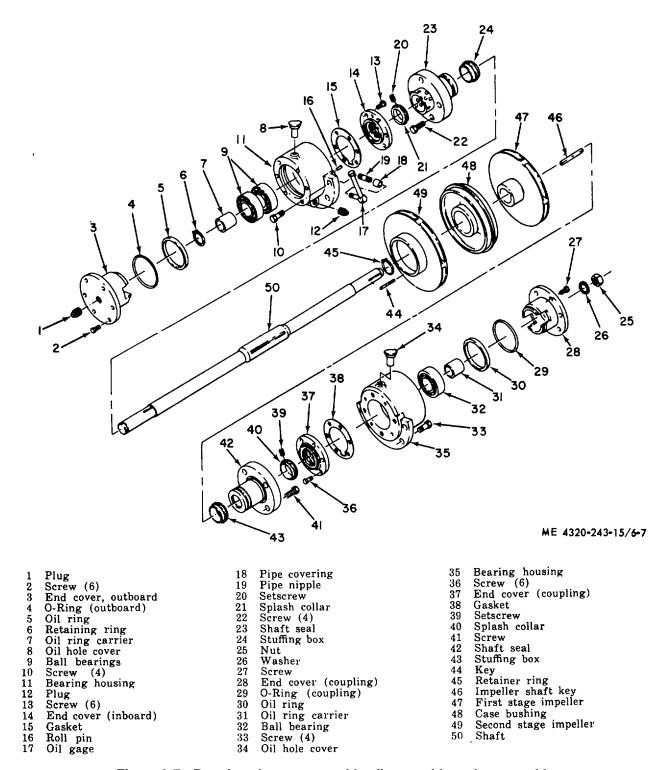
Rotating element assembly, disassembly and reassembly.
